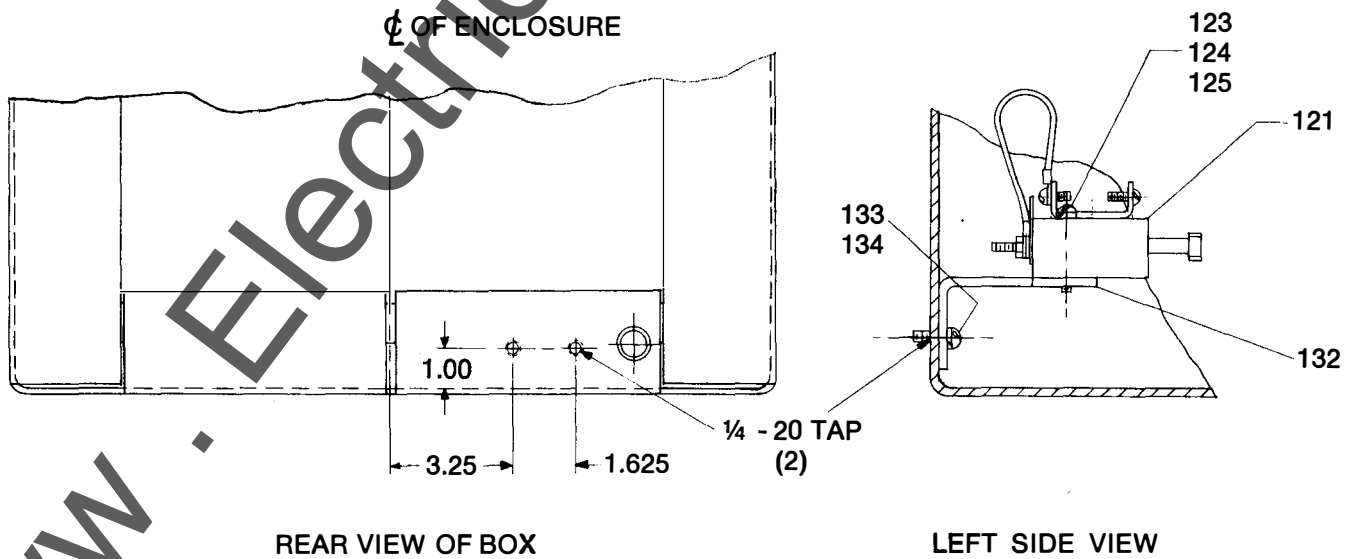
Mounting of 4th-wire neutral sensor disconnect block in AKD type OEM box.
